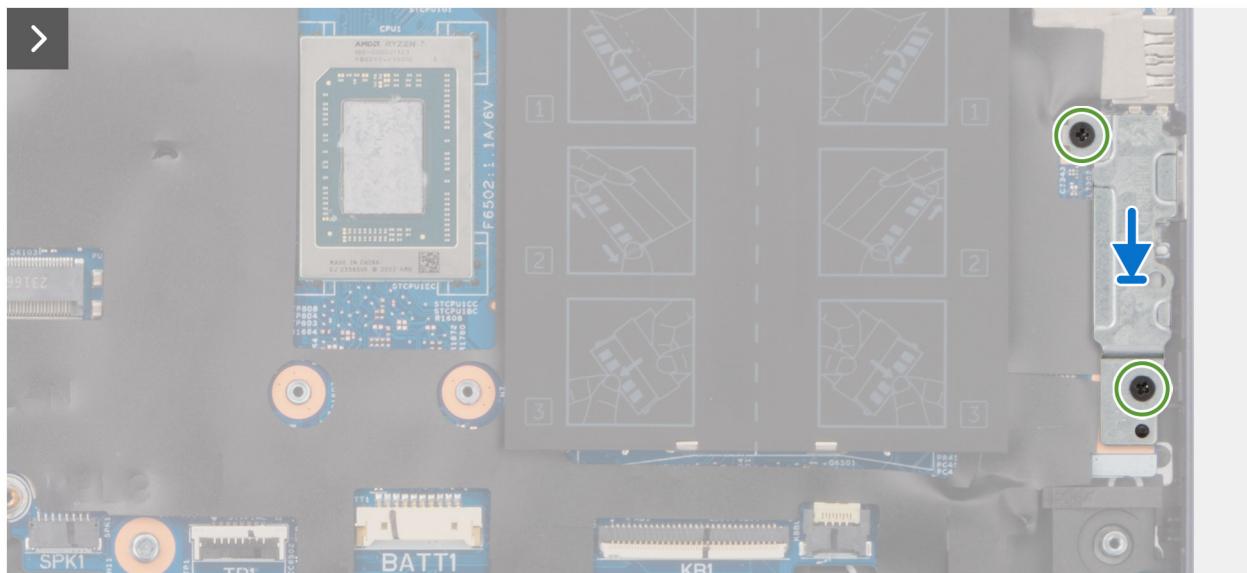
Installing the system board (for computers shipped with an aluminum chassis)
